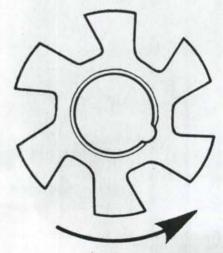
Install rotor in pump so it will turn in the direction indicated by arrow.
